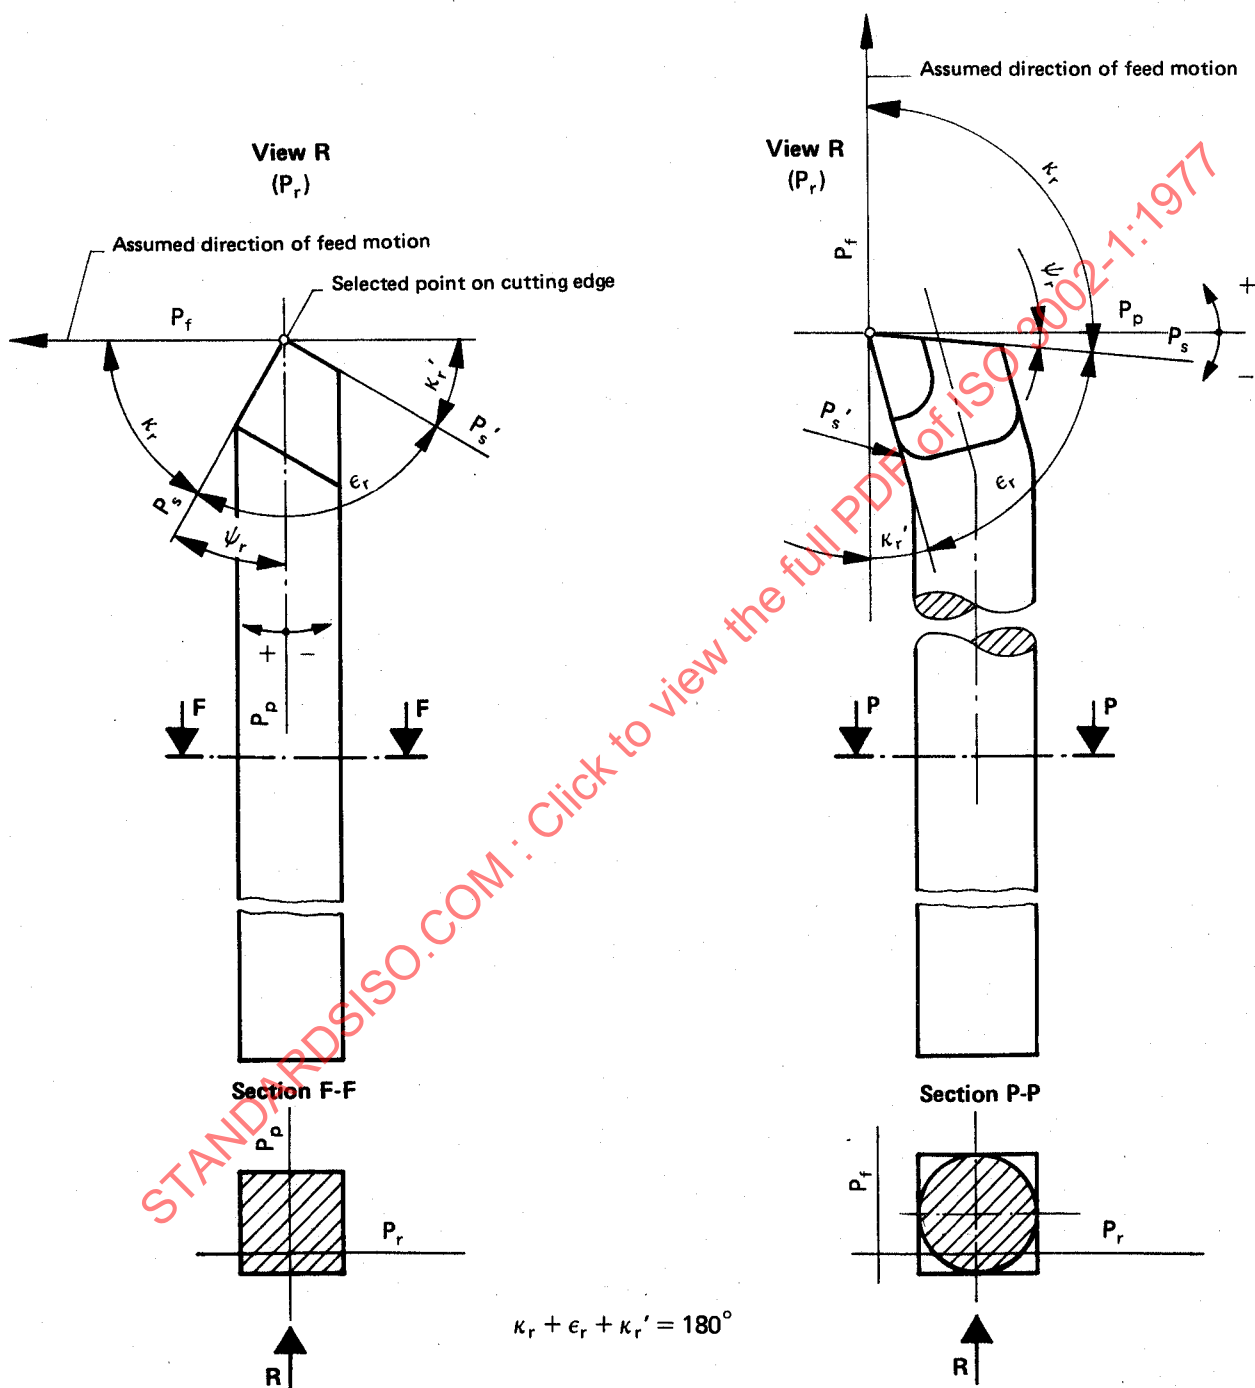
Tool cutting edge angle κ_r and tool approach angle (tool lead angle) ψ_r
